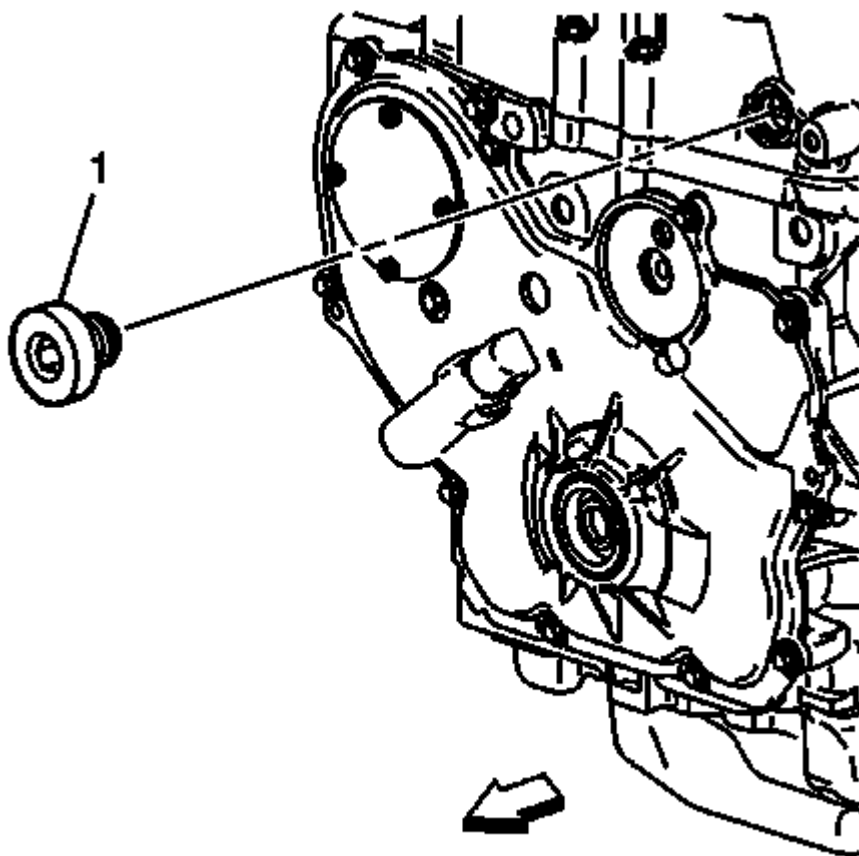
Identifying Fixed Timing Chain Guide Bolt Plug
